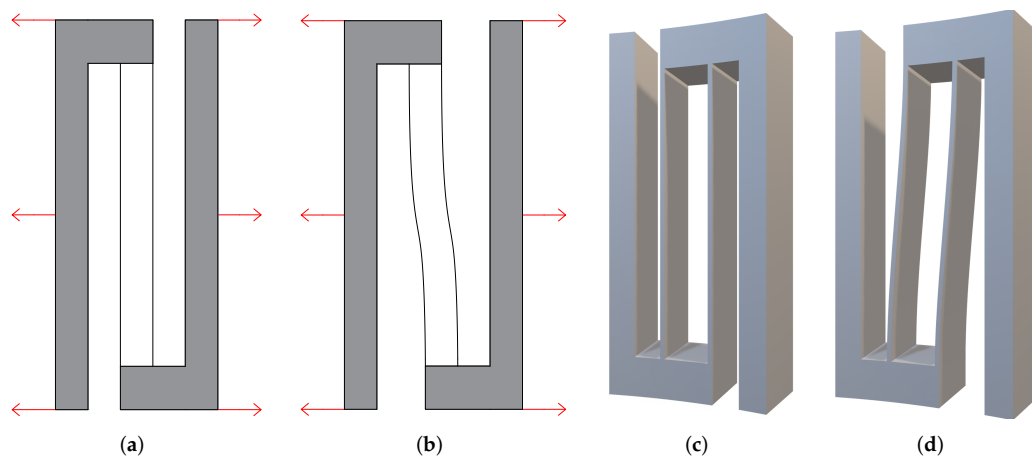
The decoupling mechanism. (a) 2D decoupling mechanism. (b) Deformed 2D decoupling mechanism. (c) 3D decoupling mechanism (load is added in the direction perpendicular to the radius direction). (d) Deformed 3D decoupling mechanism.
